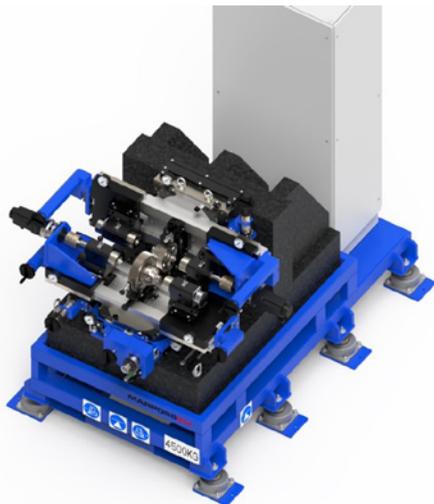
This gear tester from Marposs works on the single flank testing method where a master gear meshes with the component under inspection, identifying defects not detectable with traditional production tests.
